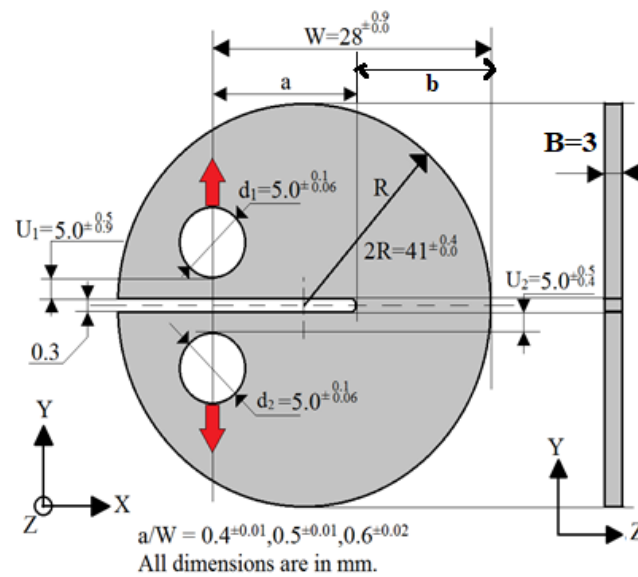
Geometrical details of the disc-shaped compact tension fracture specimen used in the test.
